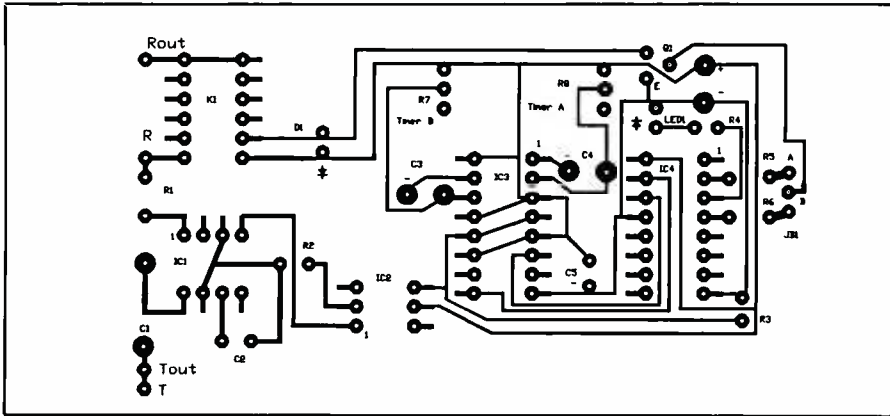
Actual-size etching-and-drilling guide for project's pc board.
